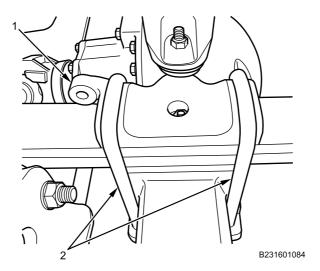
Front Shock Absorber Lower Mounting Bracket Removal.
